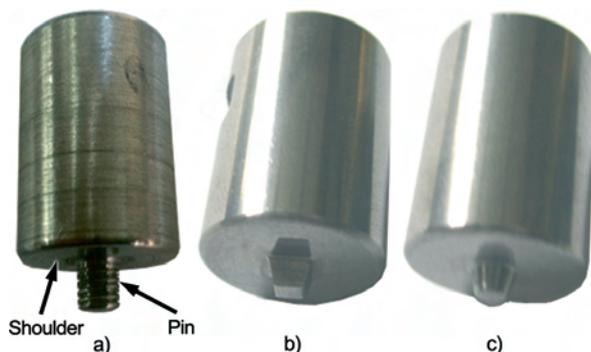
Processing tools used in the experimental program: a) Threaded cylindrical pin tool; b) Conical pin tool with 4 flat bevels; c) Smooth conical pin
